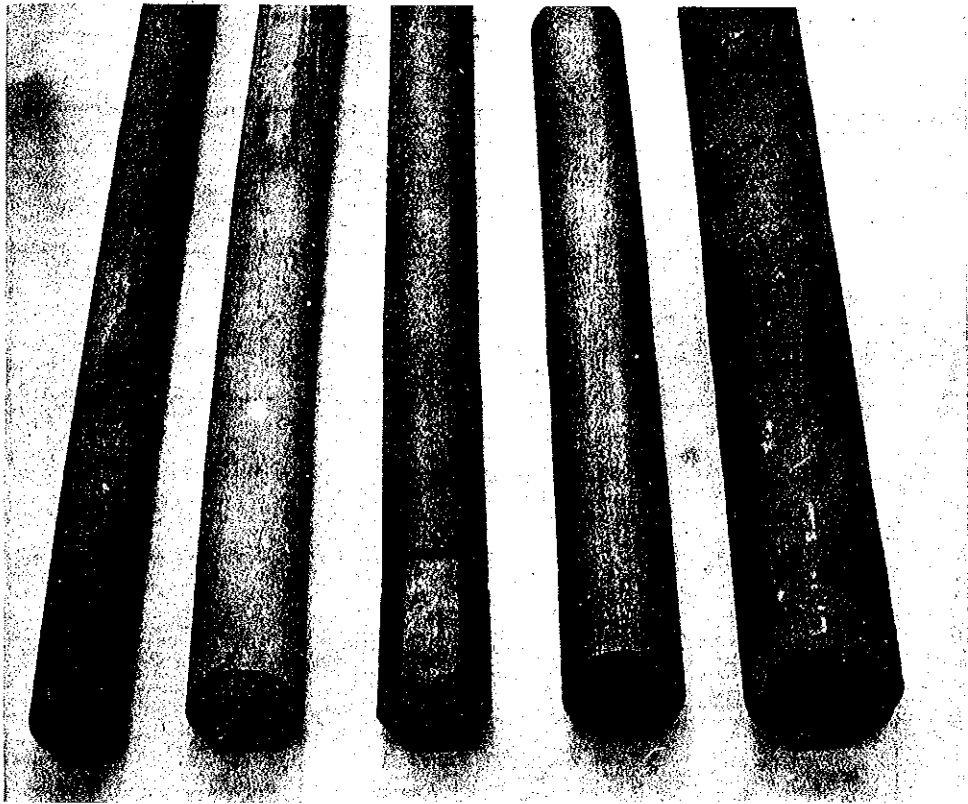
TYPICAL SATISFACTORY EXTRUDED SECTIONS
